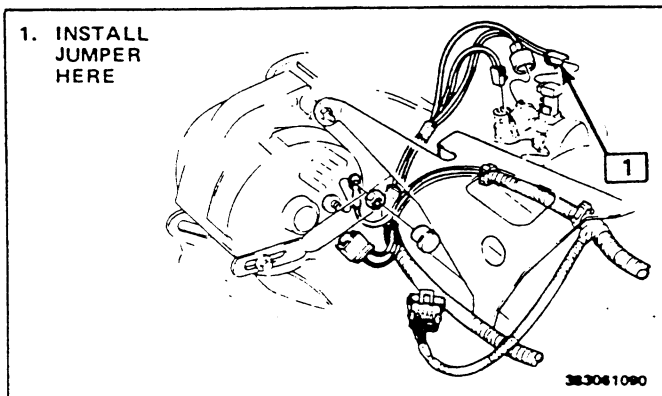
C5-13 V8 EGR-TV5 switch Jumper Location
